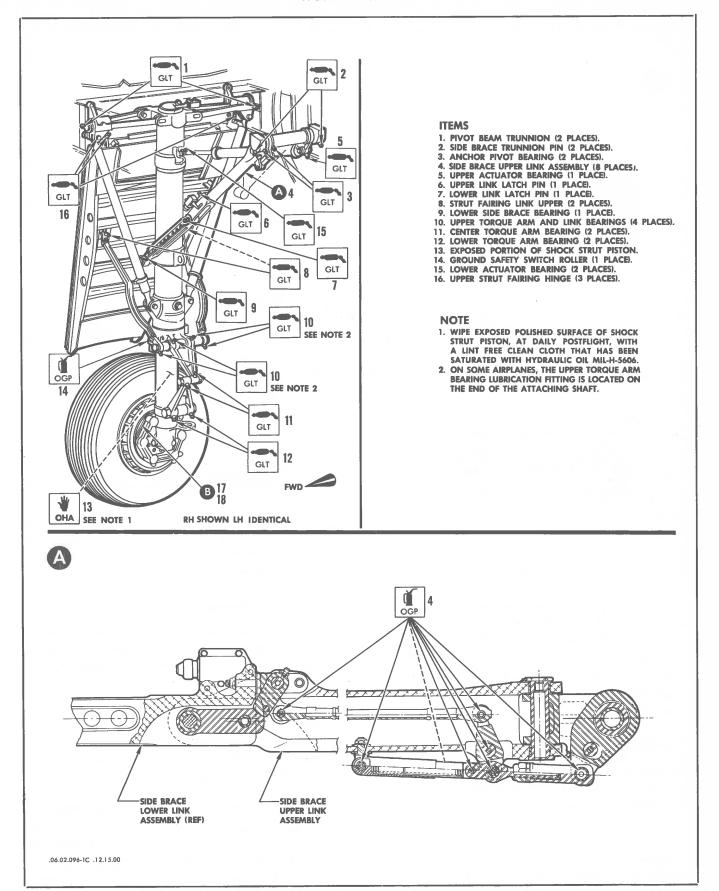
Main Landing Gear Lubrication (Sheet 1 of 2)
